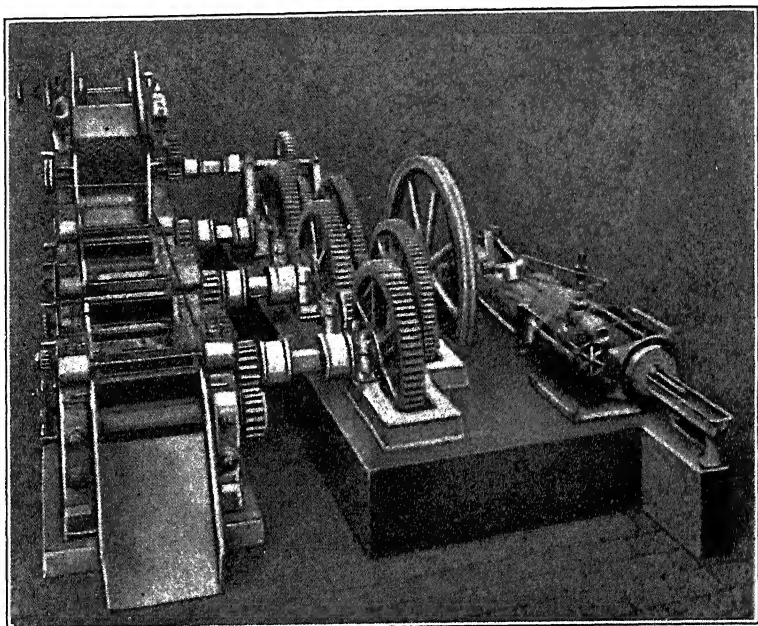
Another eleven-roller installation driven by one engine, and consisting of three mills and preparatory Krajewski crusher.
